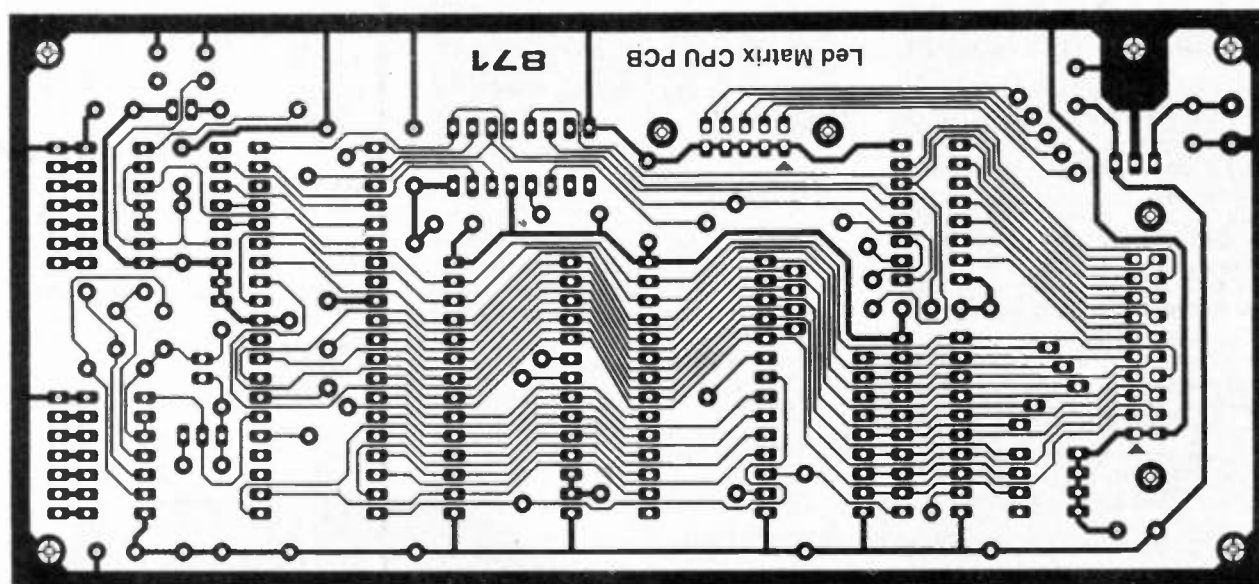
Printed circuit board component layout and full size underside copper foil master pattern for the CPU board.
